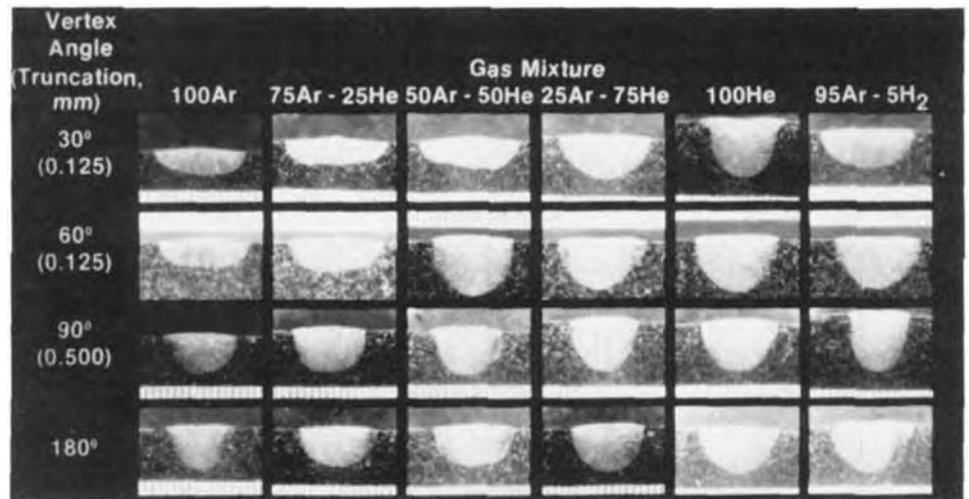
Effect of electrode tip geometry and shielding gas composition on weld pool shape for spot-on-plate welds. Welding parameters: current, 150 A; duration, 2 s
